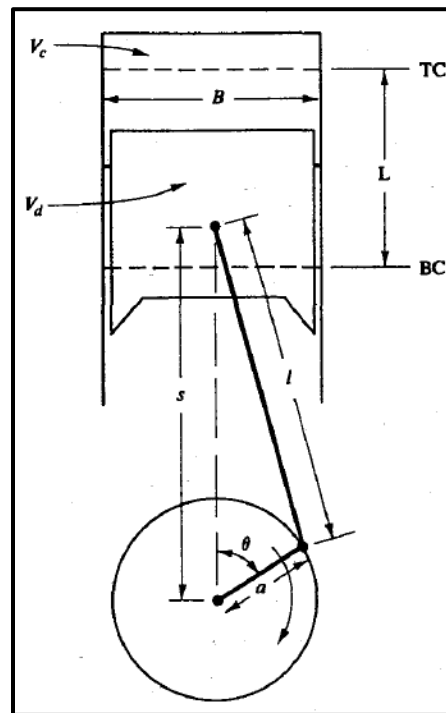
Basic geometry of cylinder, piston, connecting rod and crankshaft [8].
